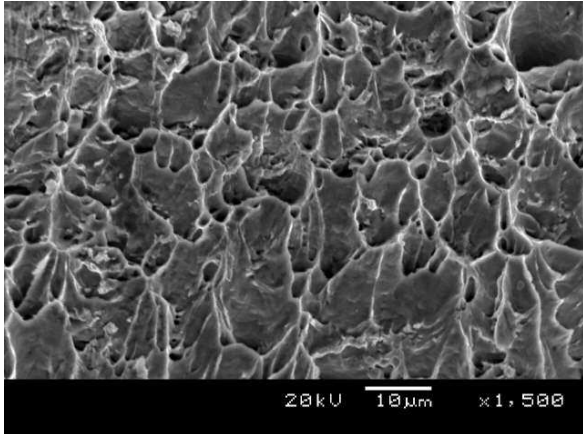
Fractograph, left hand strut fracture surface at point D (x1500, SEM)
